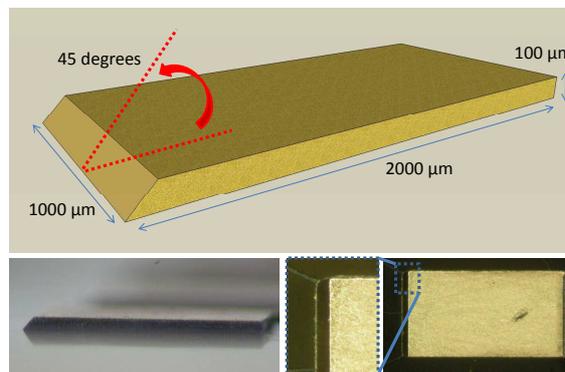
Overview of the dimensions of the mirror plug (top) and mirror plug pictures (bottom).
